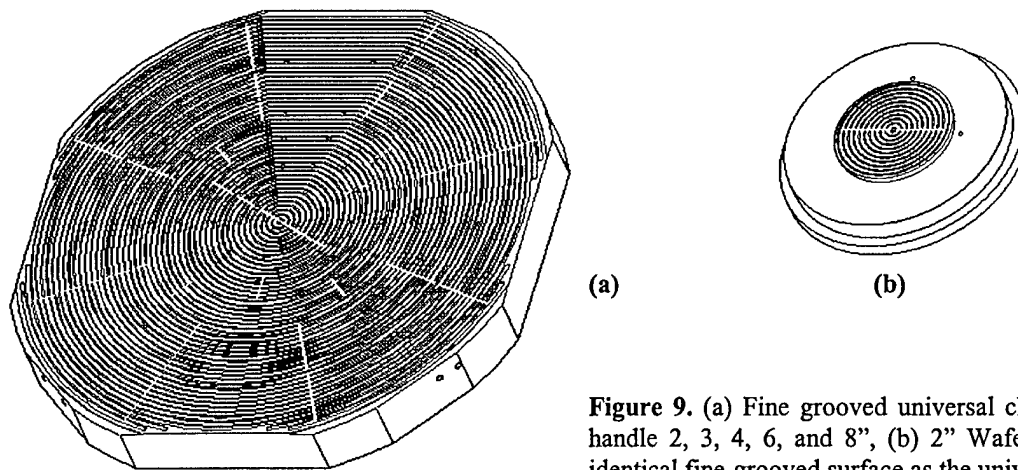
(a) Fine grooved universal chuck that can handle 2, 3, 4, 6, and 8", (b) 2" Wafer chuck with identical fine-grooved surface as the universal chuck
